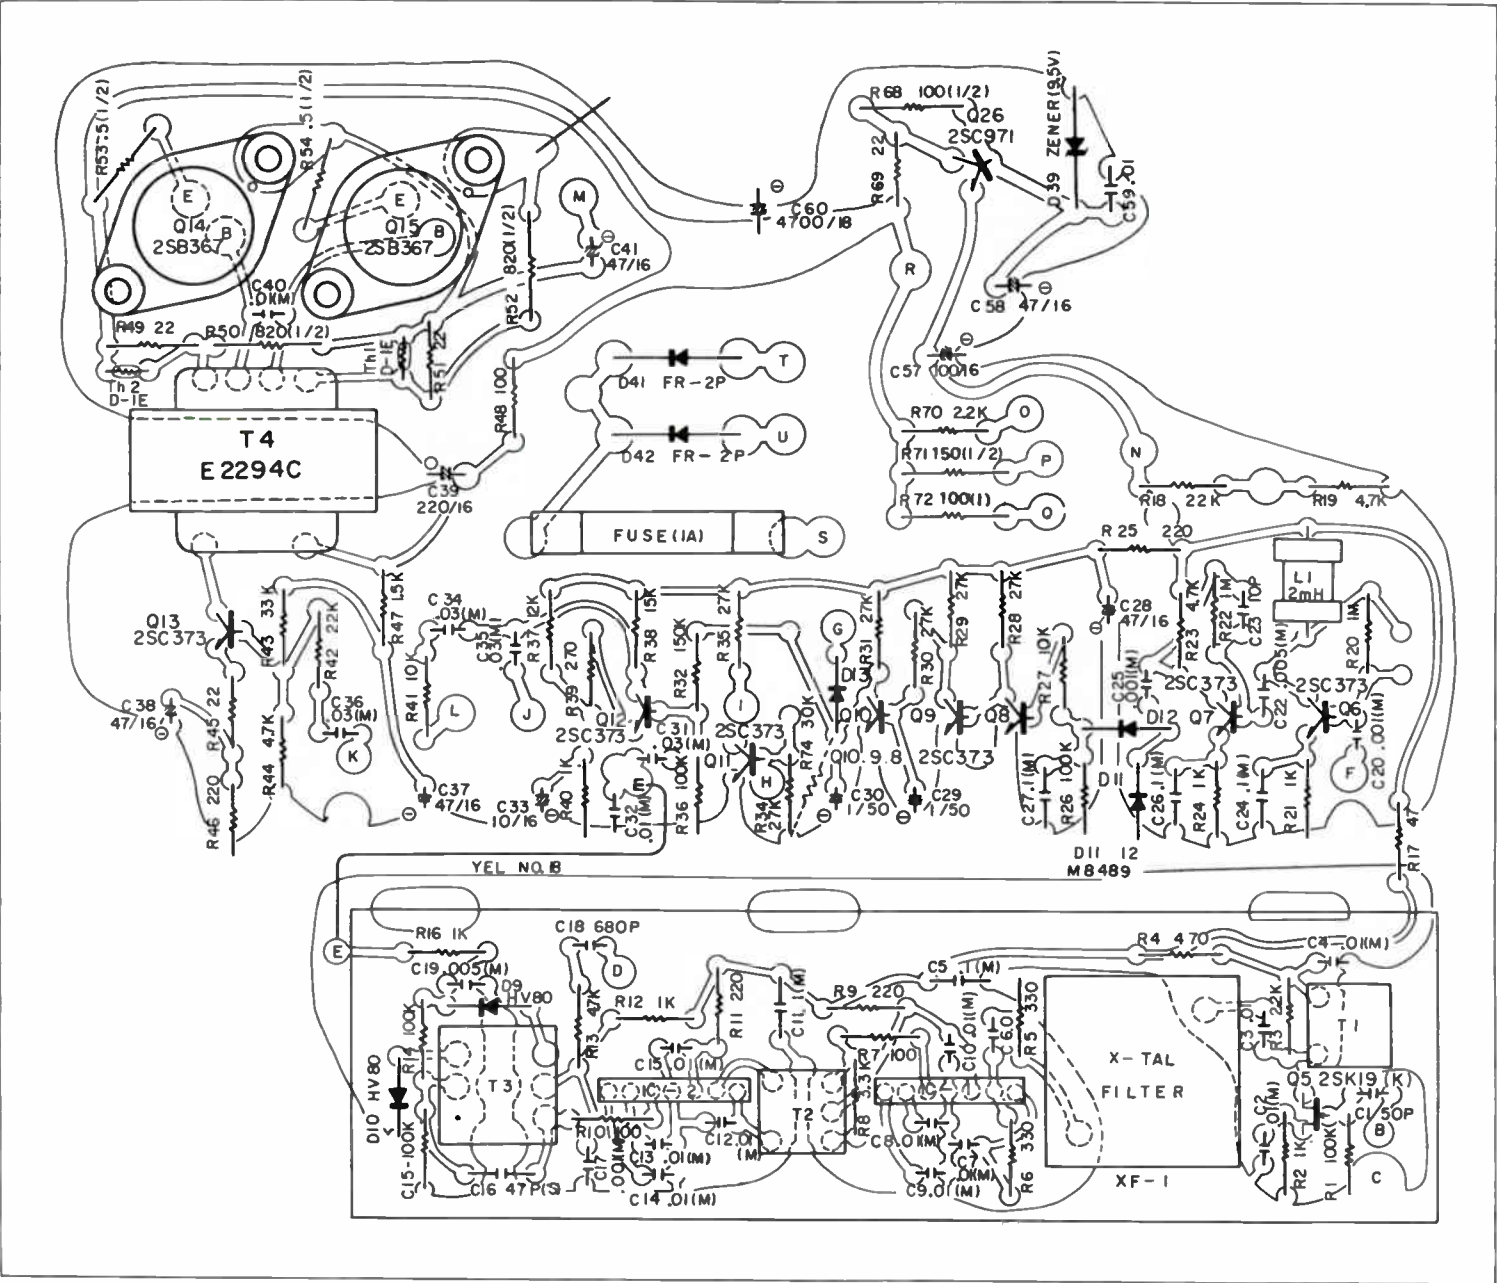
DELAY CIRCUIT P.C.B. PARTS LOCATION
